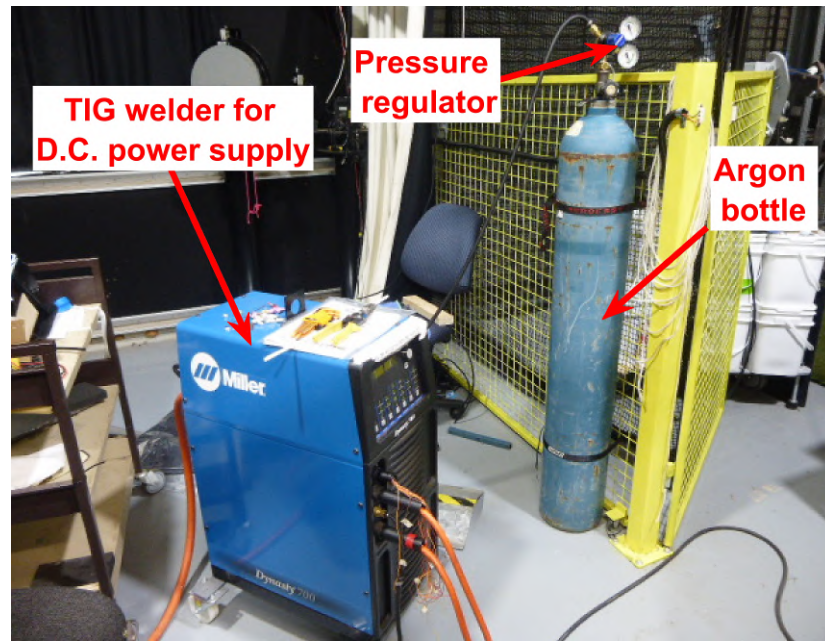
Miller Dynasty 700 TIG welder used for the DC power supply to the model.
